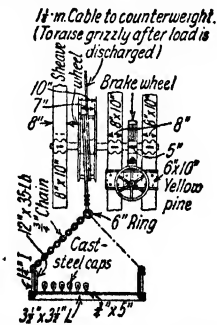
Movable sorting grizzly, Port Henry Iron Ore Co.
